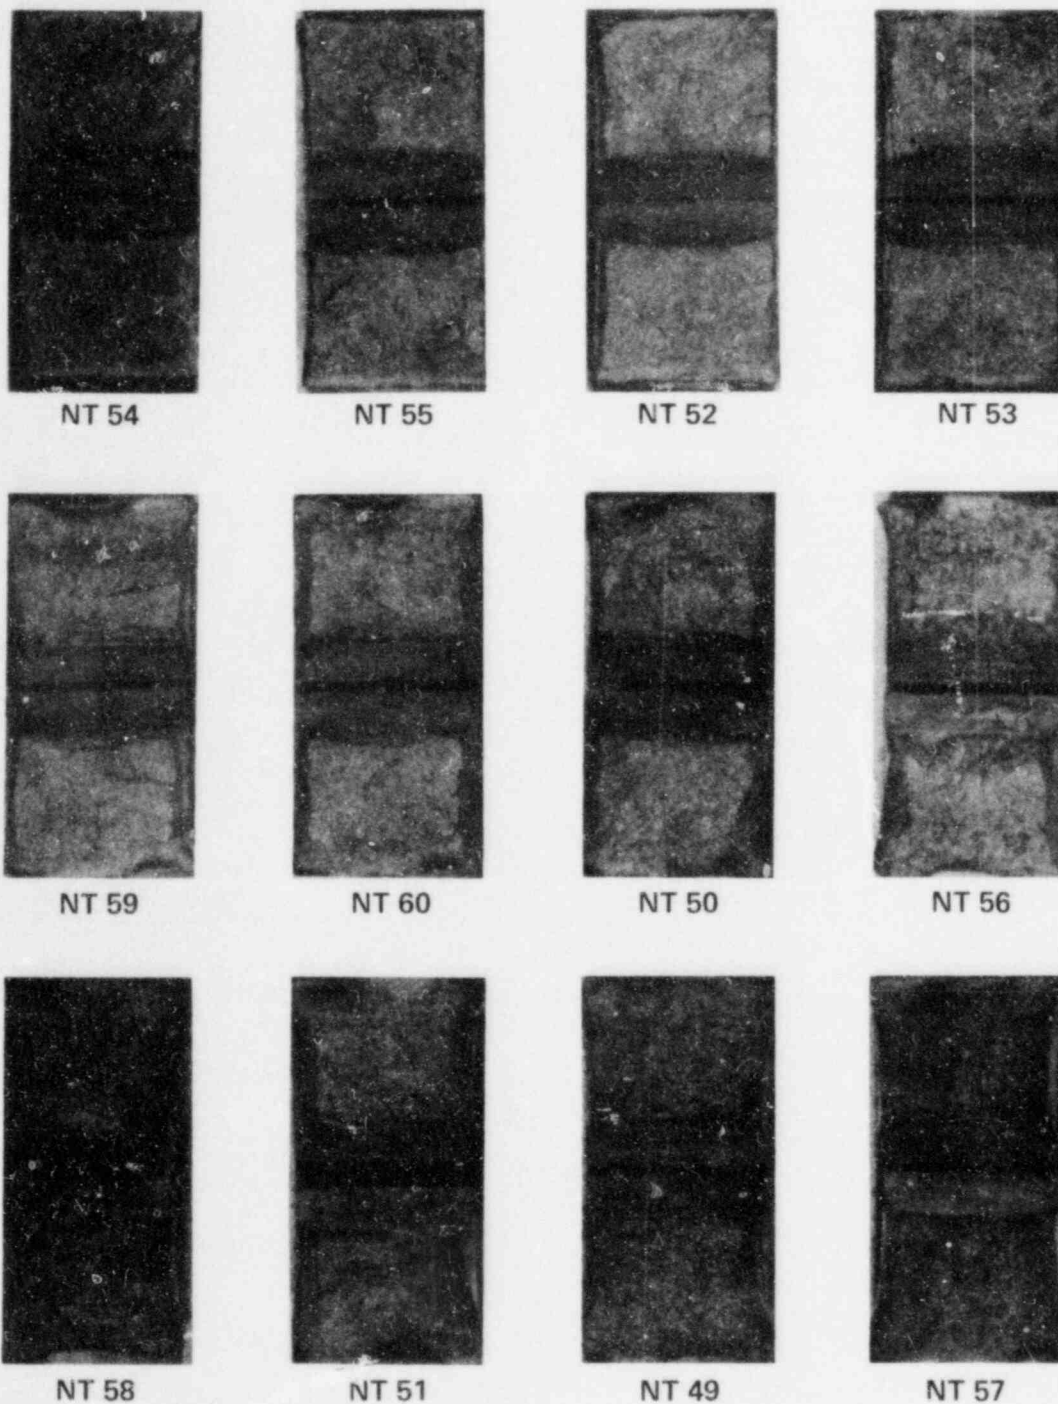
Charpy Impact Specimen Fracture Surfaces for Sequoyah Unit 2 Pressure Vessel Intermediate Shell Forging 05 (Axial Orientation)
